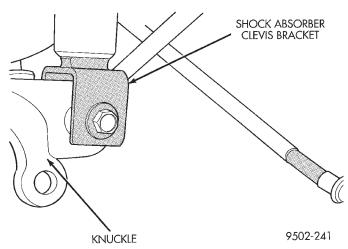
Shock Absorber Attachment To Knuckle INSTALLATION
